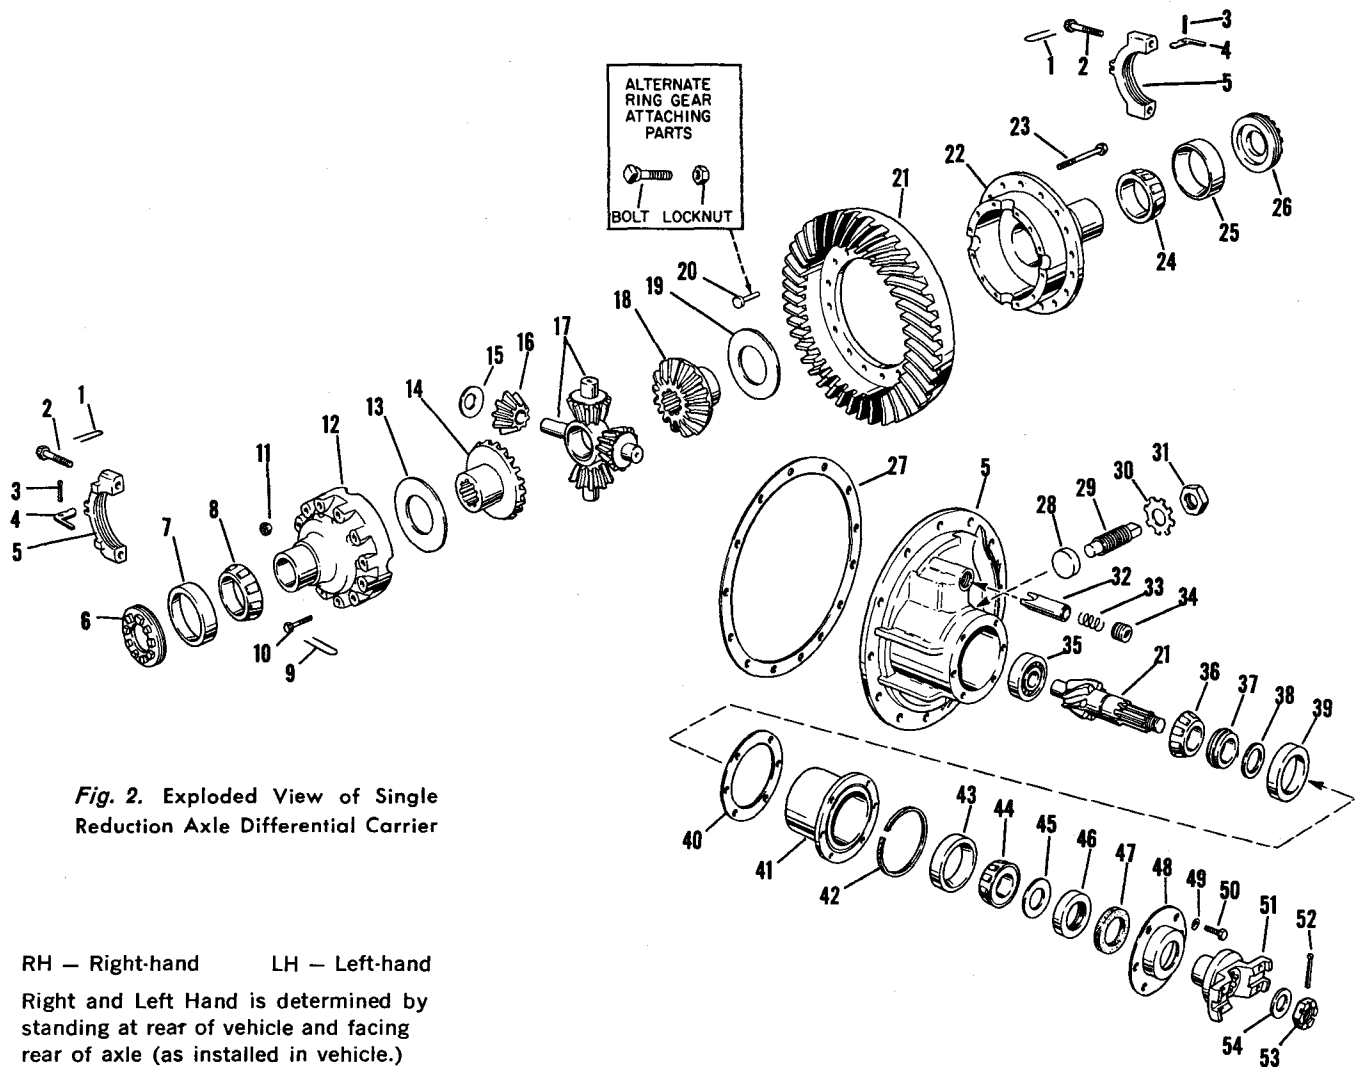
Exploded View of Single Reduction Axle Differential Carrier
